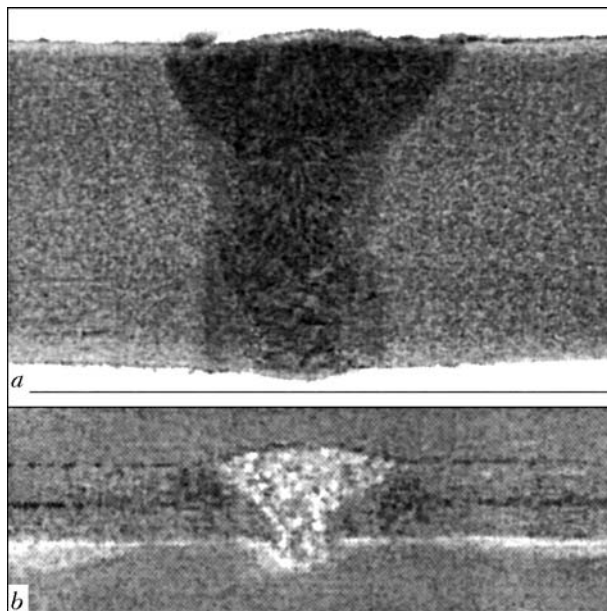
Macrostructure of butt joints made by laser-arc welding: *a* – steel X70 of 18.7 mm thickness, 4 passes (2.7 kW radiation power, 25 m/h welding speed, 400 m/h wire feed speed (1.2 mm dia.), 200 A welding current, 25 V voltage, CO₂ shielding (×2.5); *b* – alloy AMg6 of 1.9 mm thickness (2.5 kW radiation power, 300 m/h welding speed, 760 m/h wire feed speed, 200 A welding current, Ar shielding) (×5)
